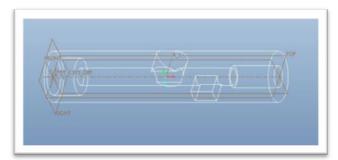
Launch Valve 3D Wireframe (PTC Creo)
